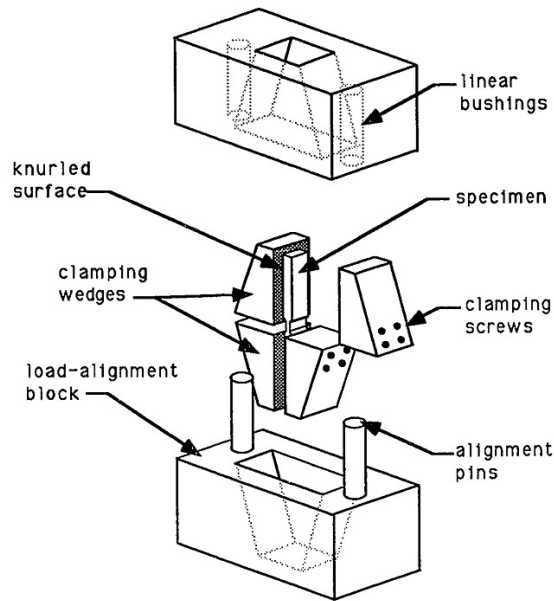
Exploded view of the IITRI test fixture (ASTM D 3410) [4]
